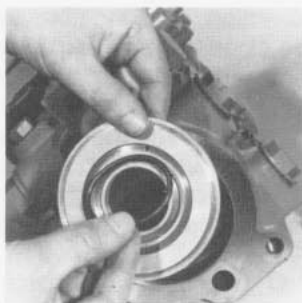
Remove O-Rings (Earlier Unit Shown)
